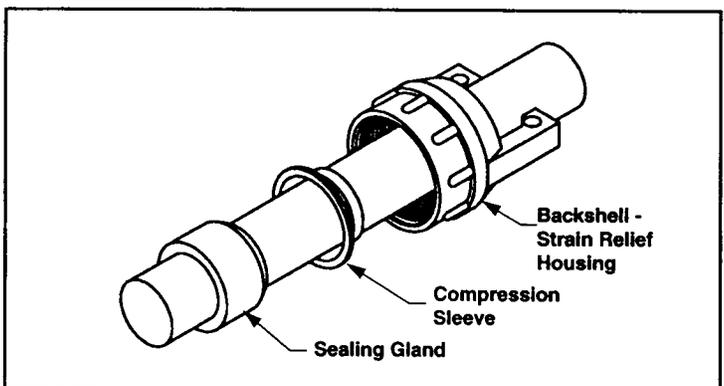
Figure VI: Assembly of Sealing Gland, Compression Sleeve and Backshell
